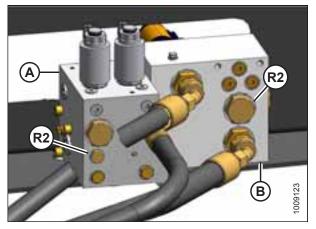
Manifolds without Reverser Valve in Factory Configuration
